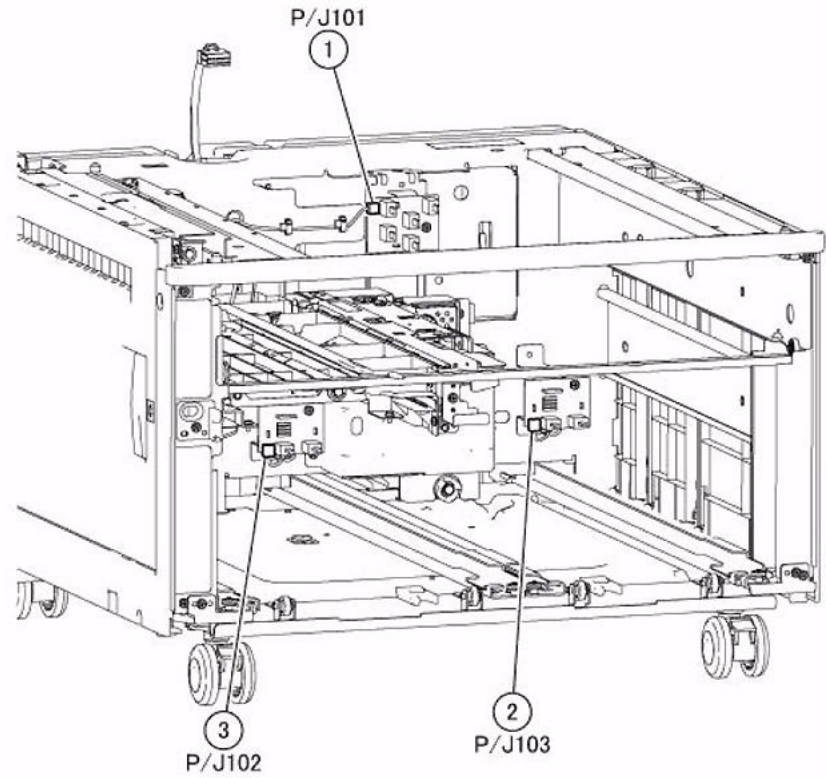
TT Module - Tray 2/3/4 Paper Size Sensor
